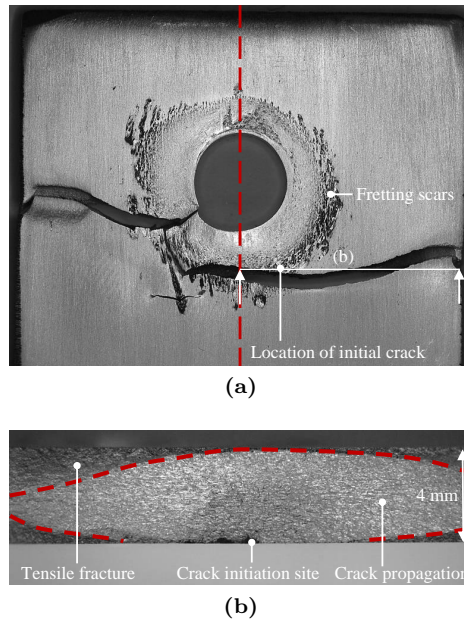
(a) Fretting scars in the middle plate of DBLJ and (b) fracture surface of the middle plate and the location of initial crack.
